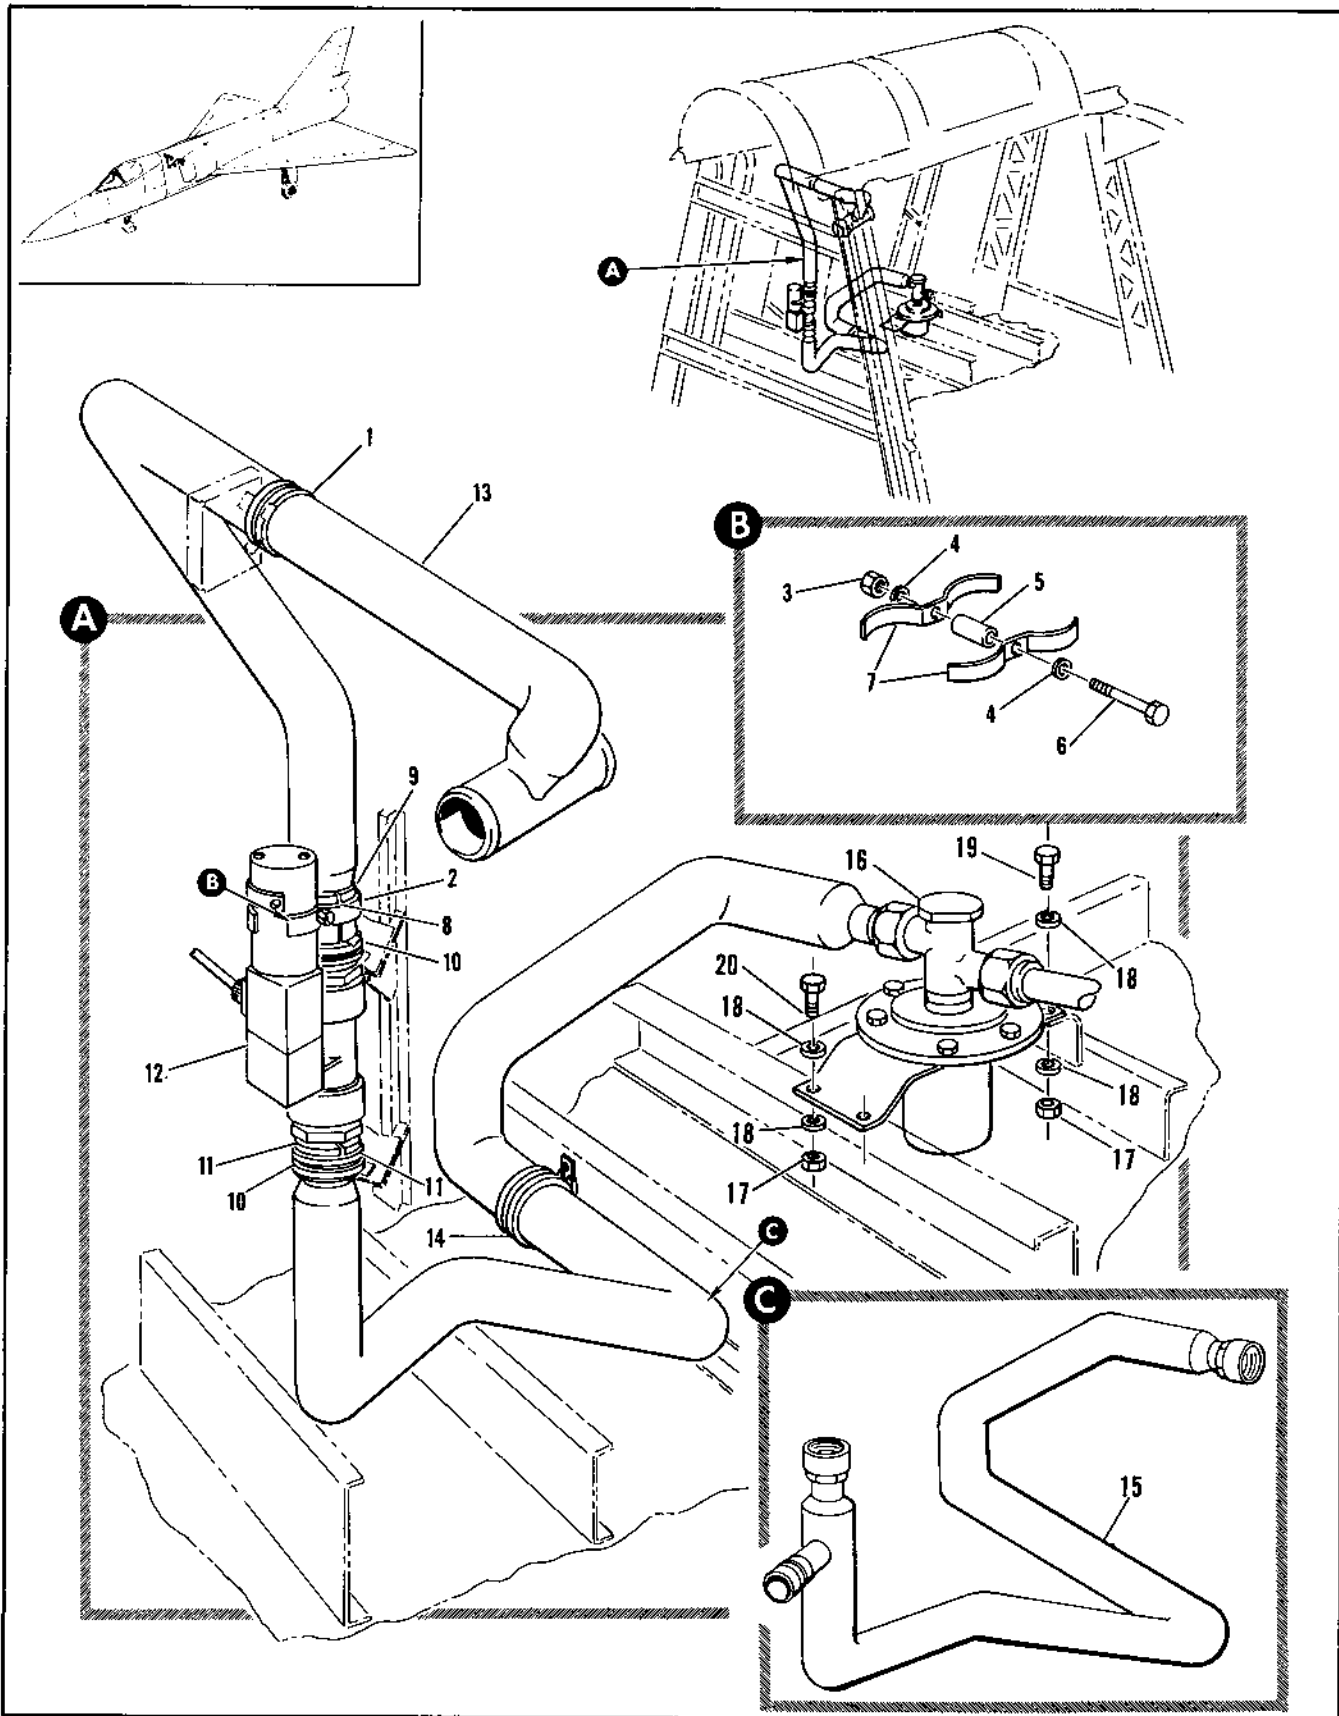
Cockpit Hot Air Bypass Duct Installation Sta 267 to 309
